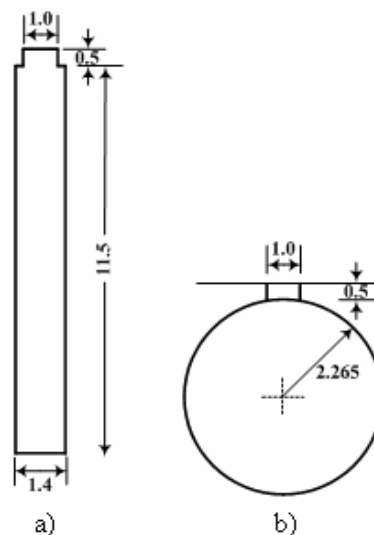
Dimensions (in mm) of rotor slot shapes: a) rectangular rotor slot, b) round rotor slot
